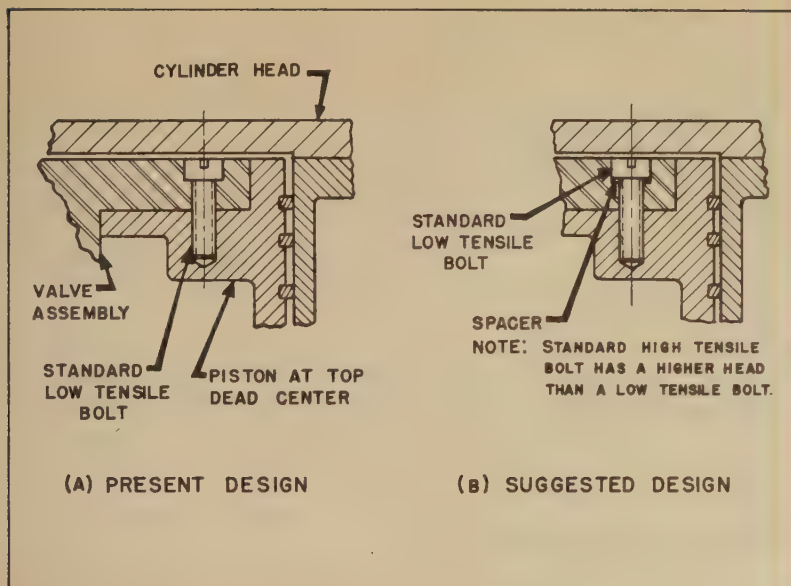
Using a standard screw, A, in a reciprocating pump to hold a valve in the piston head, breakage caused considerable trouble. Higher fatigue strength bolts could not be substituted because they were made to a different standard, and the alternate was to remachine the valve assembly, prohibitive because of cost. If the original design had been to take either soft or hard bolts, as in B, no difficulty would have been encountered.
